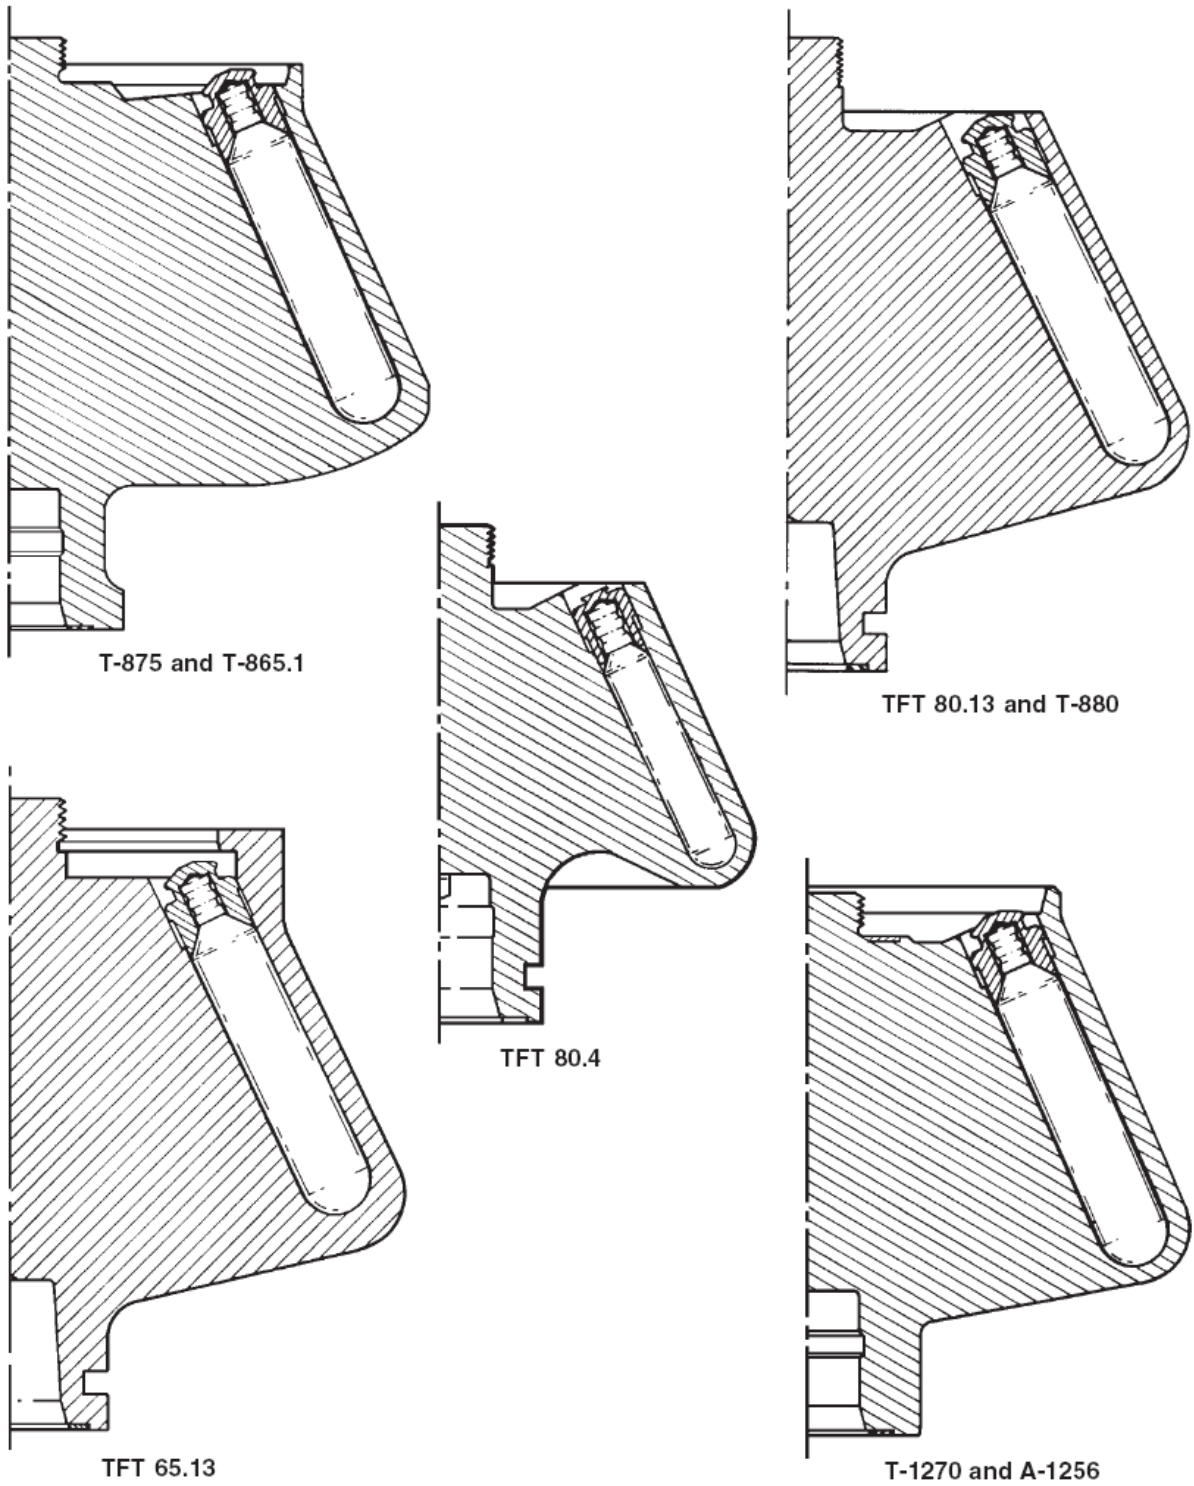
Properly Seated Rotor Caps in Ultraspeed Centrifuge Rotors
